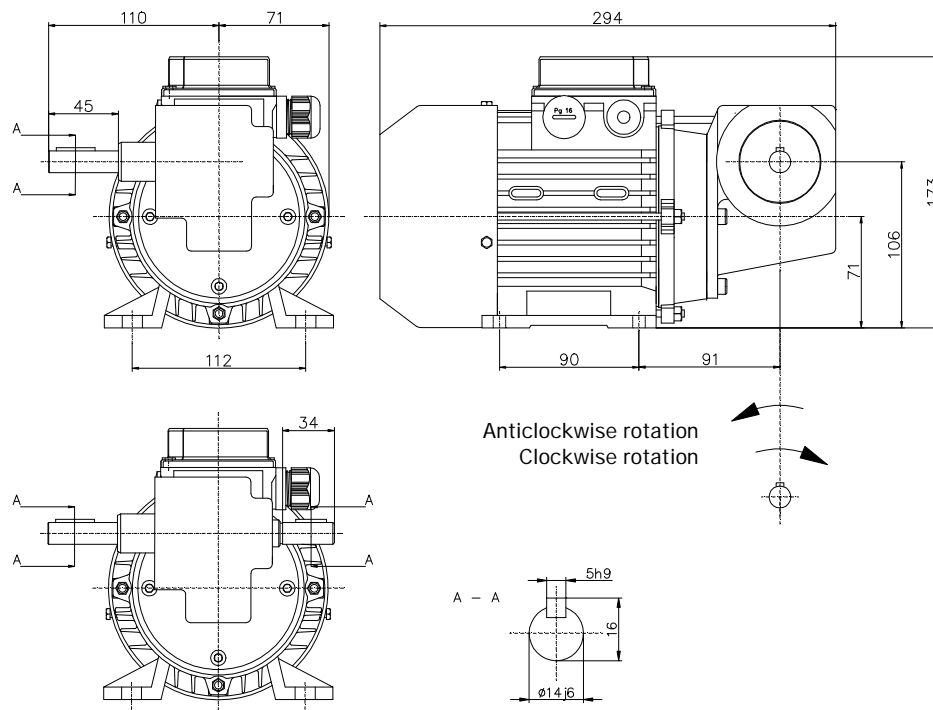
Dimensions of EMS-VVX 4 motor, with one and two shafts.
